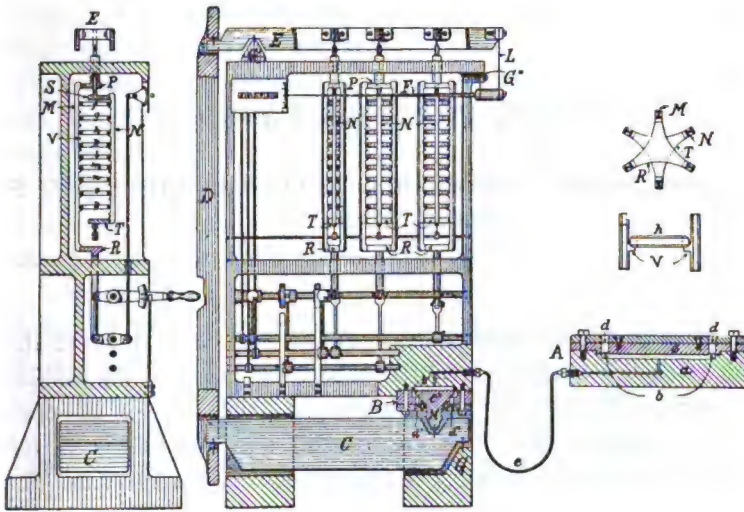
EMERY TESTING MACHINE WEIGHING MECHANISM.
